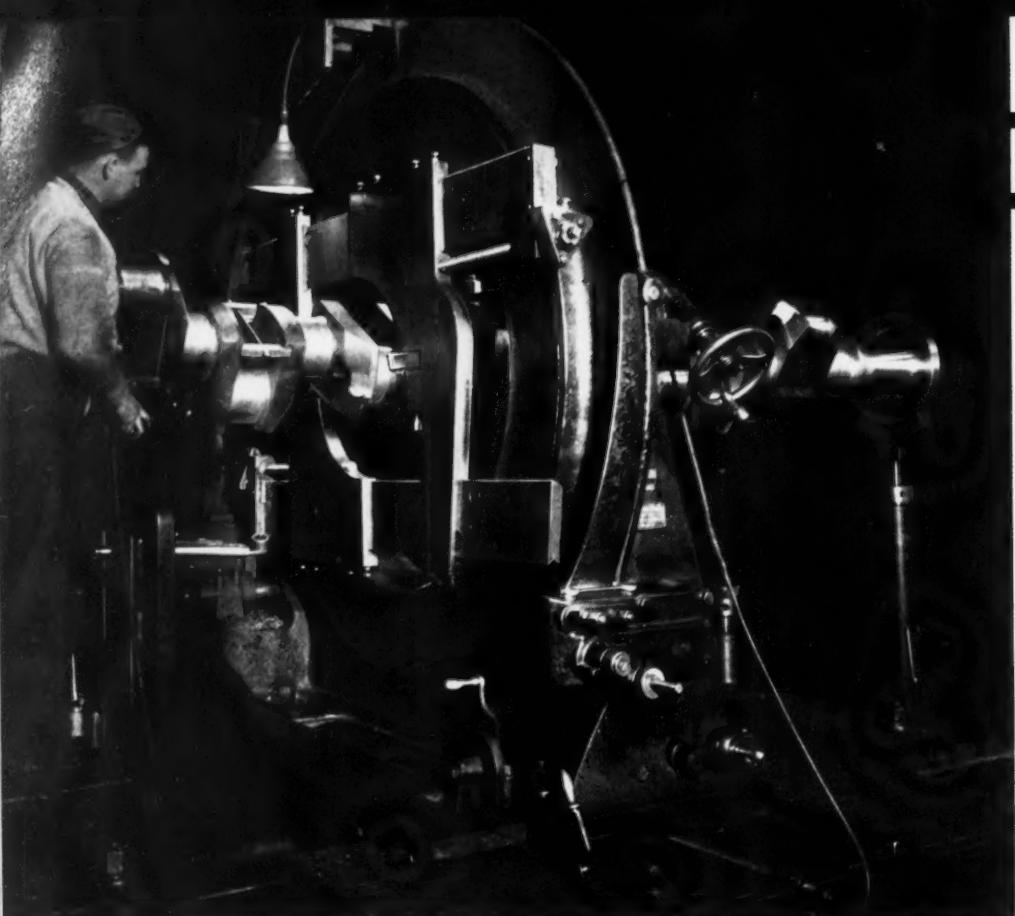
(Left) Finish-turning Crankpins of a Diesel-engine Crankshaft on a Machine which is so Designed that the Tools Revolve around the Stationary Work
